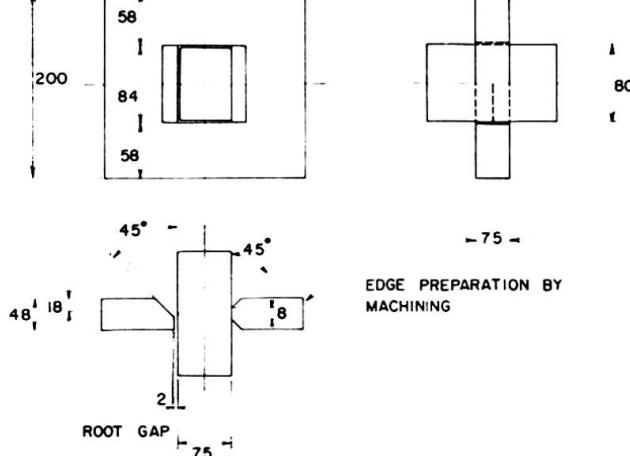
DETAILS OF RESTRAINT CRACK TEST SPECIMEN
